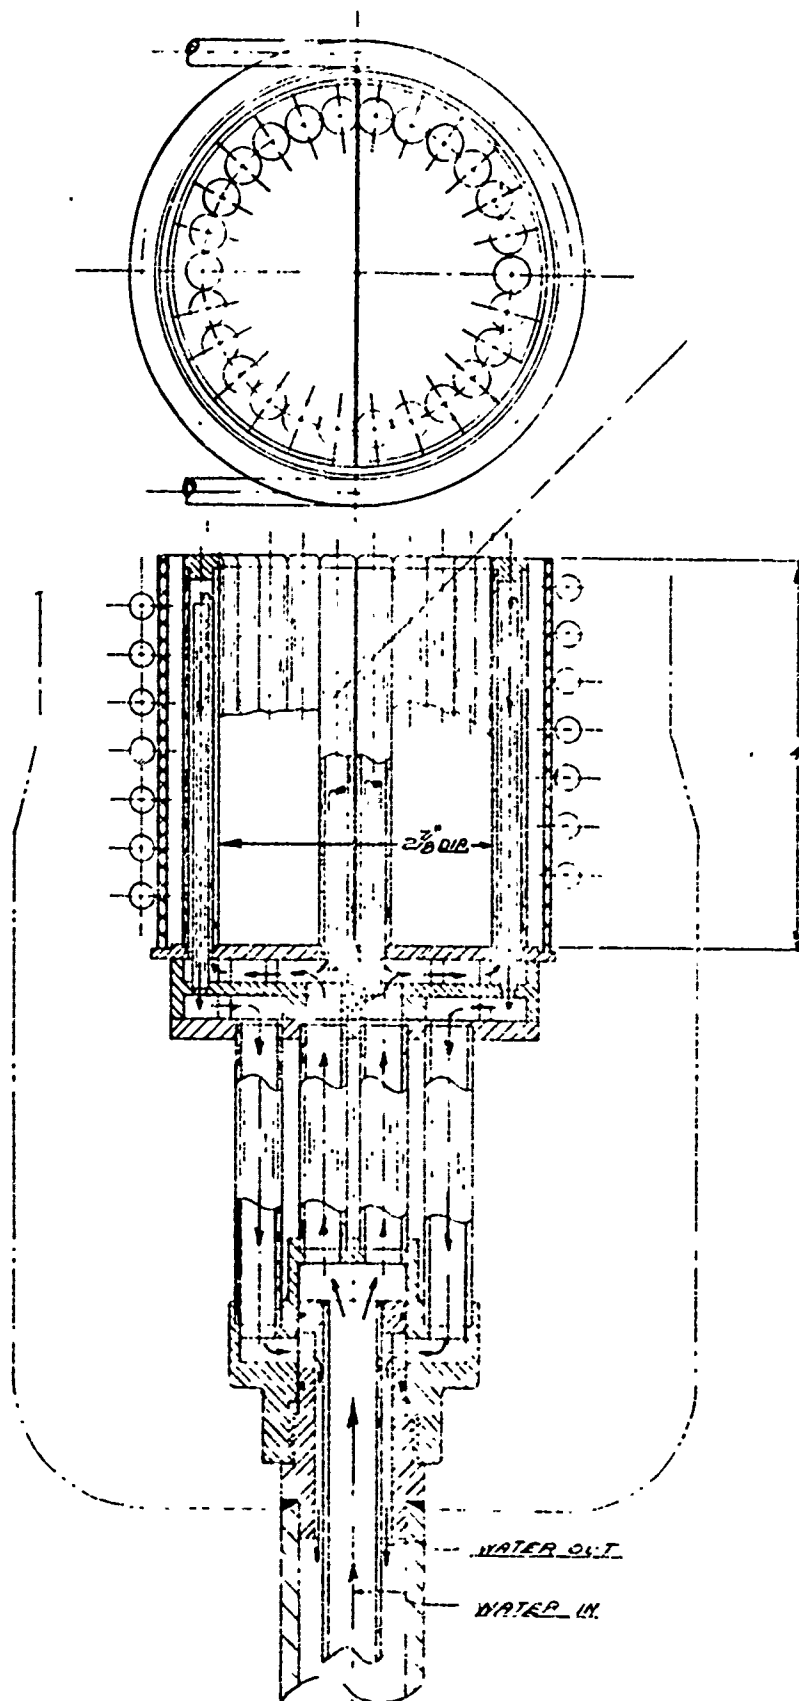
SCHEMATIC DRAWING OF THE ADL COLD CRUCIBLE ASSEMBLY
